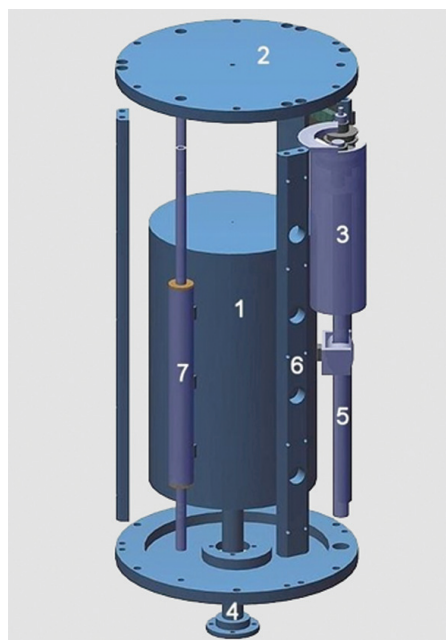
Exploded view of the solidification furnace 1: furnace; 2: top of the external structure; 3: driving motor; 4: sample holder; 5: jackscrew; 6: structural bars; 7: sliding guide bars.
